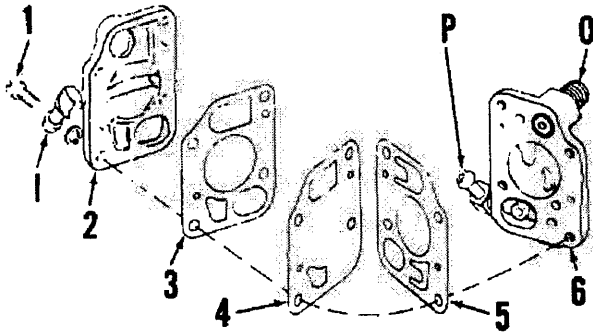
Exploded view of fuel pump assembly used on type 381 engines.
